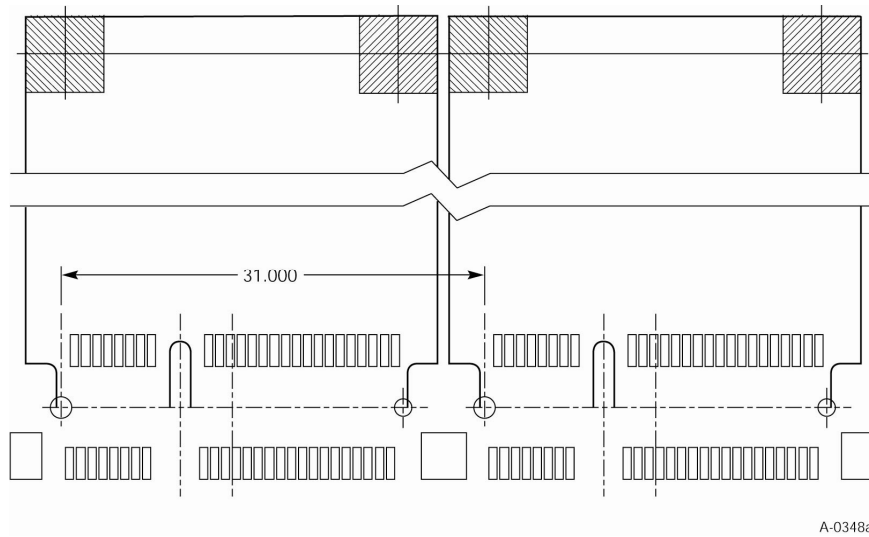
Recommended System Board Layout for Dual Head-to-Head Sockets
